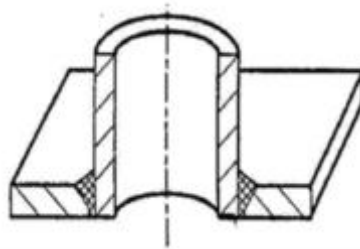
Pipe-to-plate fillet welds of insertion type
